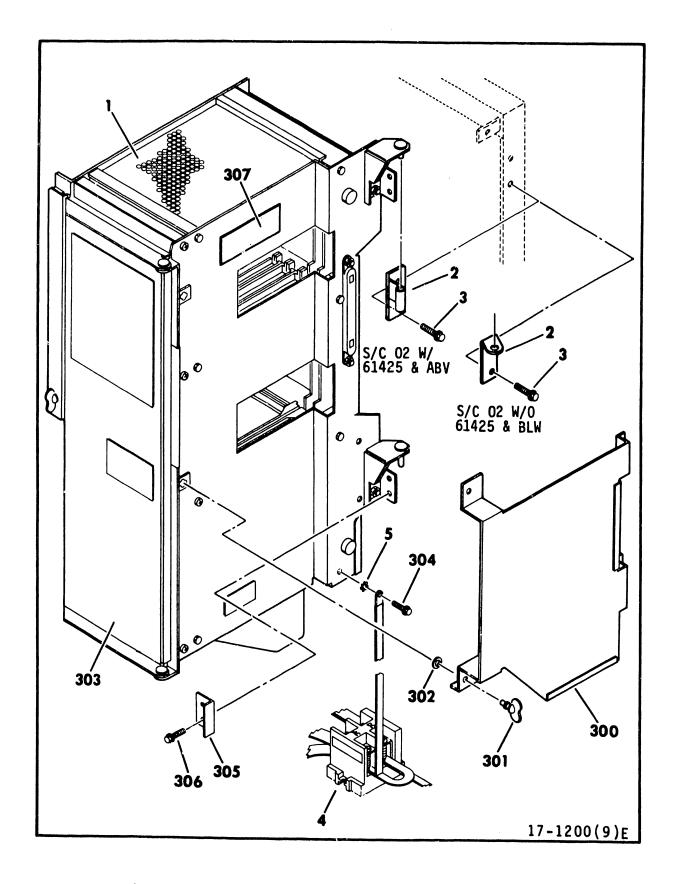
A-12. Frame & Air Assembly(Sheet 11)
